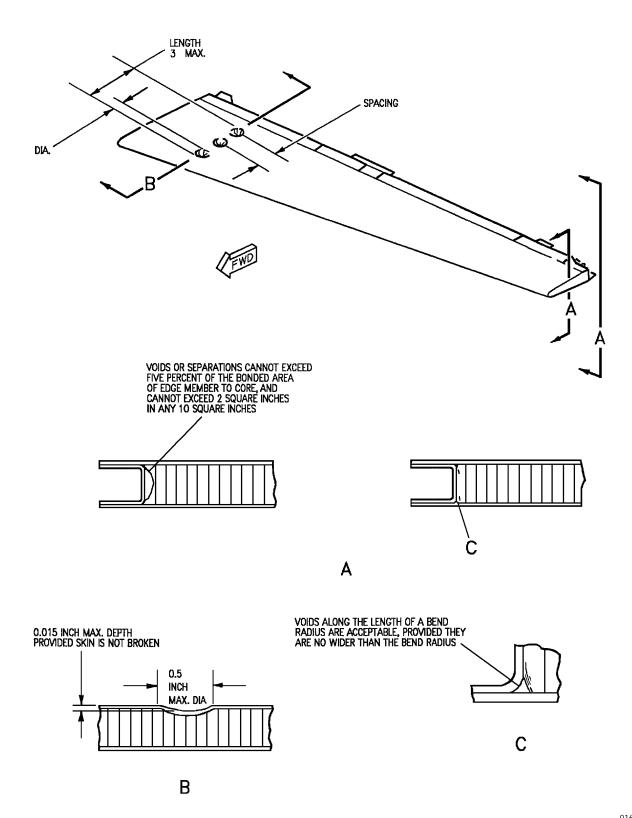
Negligible Damage, Aluminum Skin and Aluminum Honeycomb Core
